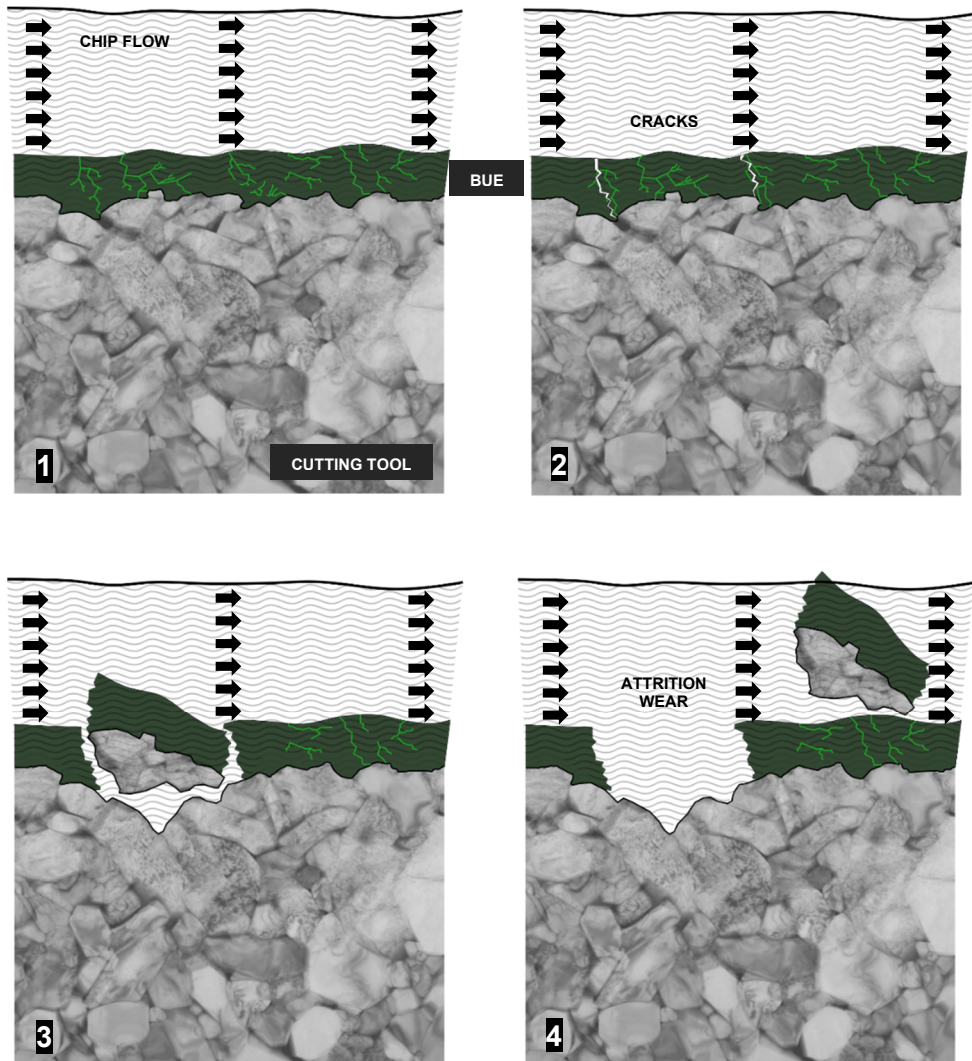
Schematic of BUE attrition wear mechanism in metal cutting
